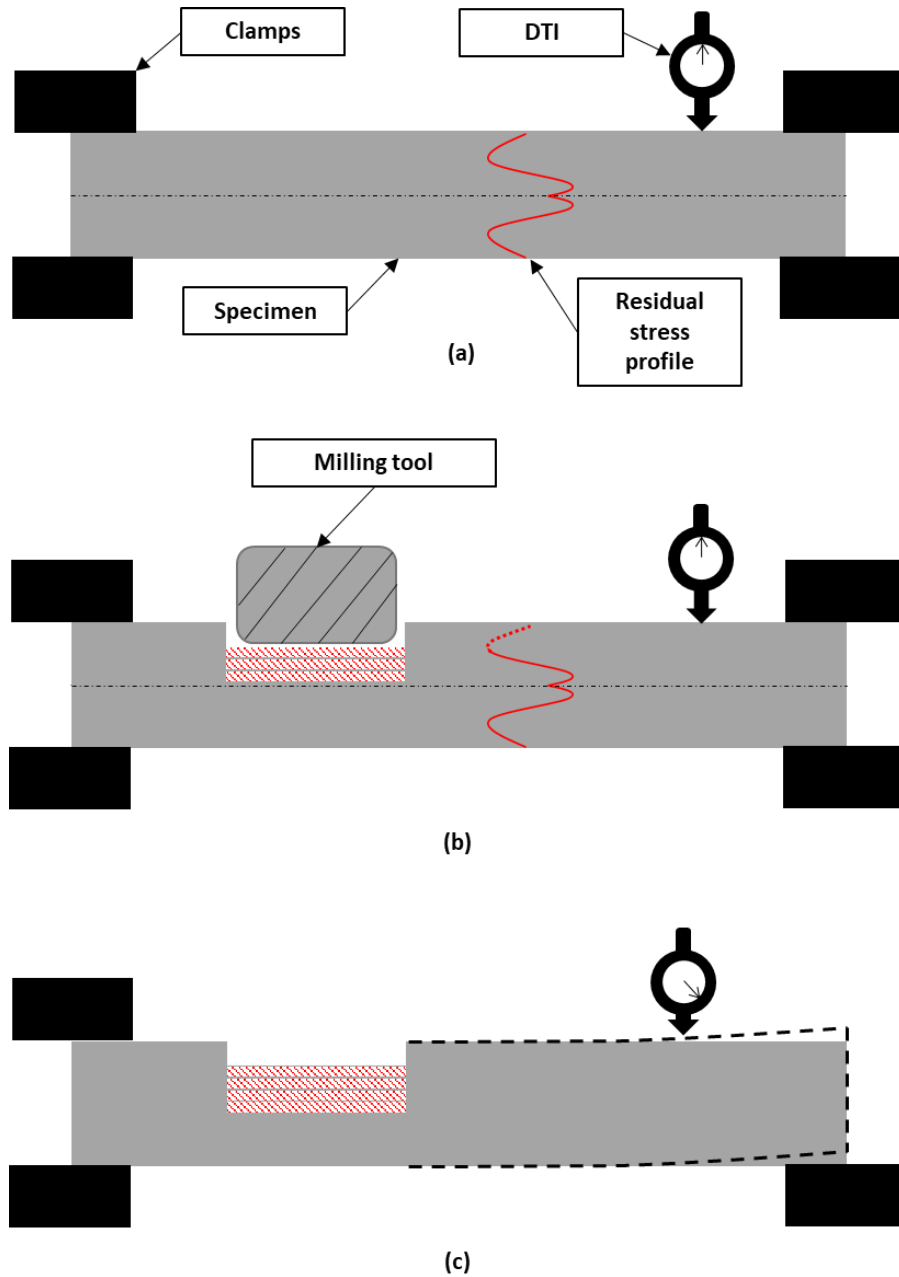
Diagram of layer removal method: (a) test setup; (b) milling of the test sample; and (c) process of clamp release and beam deflection measurement.
